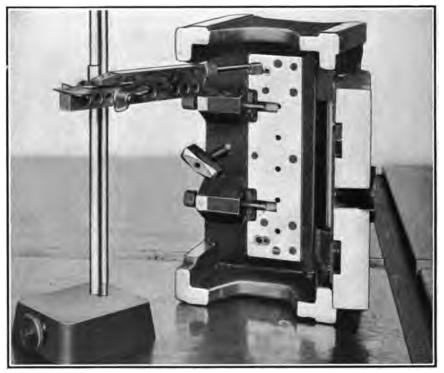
GETTING SIZE AND CENTER HIGHT OF A HOLE IN A JIG
